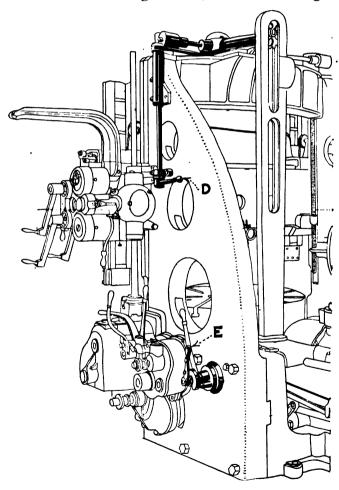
OPERATING MECHANISM FOR MOVING RAIL, 42, 60 AND 84-INCH GISHOLT BORING MILLS
